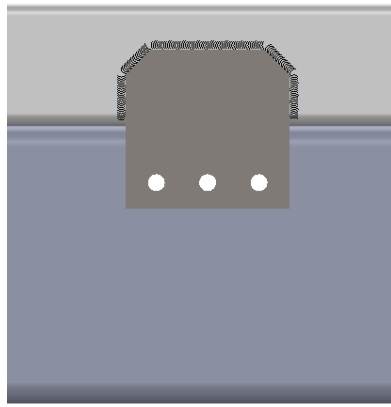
Traditional Plate & Weld Design Figure 5-62 - Mercedes Plate & Weld Design
